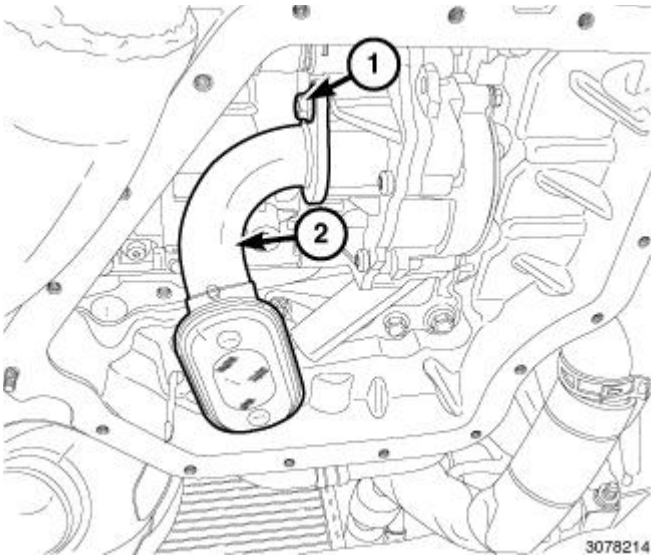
Oil Pump Pick-Up Tube & Bolt
